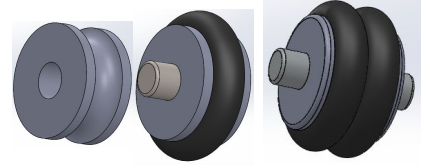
Roller designs with U groove(s), a pin and o-rings.
